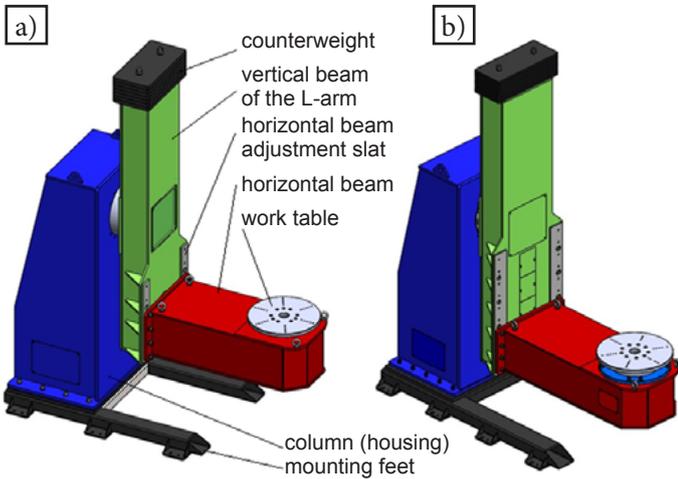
Three-dimensional models of the L-type positioner obtained using the CAD-based modelling process: a) initial design and b) final design, used in the construction of the prototype [5]
